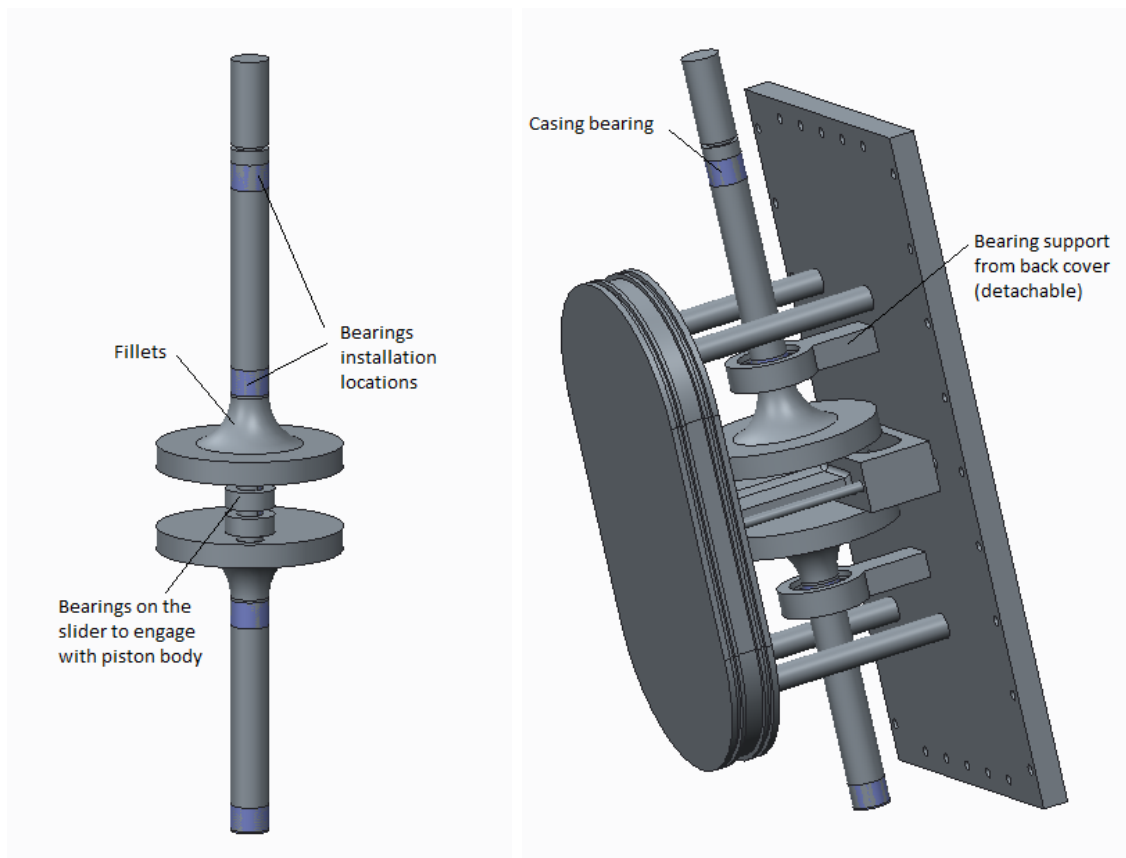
Full shaft design with fillets (left), and piston engagement with shaft positioned by bearings fitted in supports attached to the casing back cover (right).
